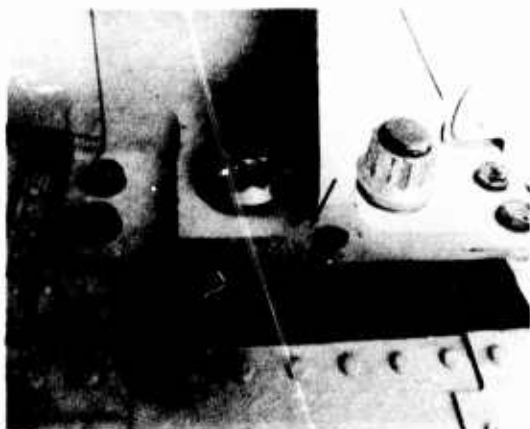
Cracked Mounting Pad - Rear Spar (KSC photo)
